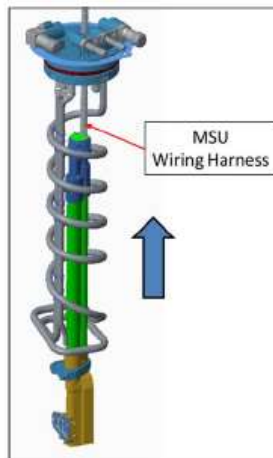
Feed the sensor harness through the bottom of the mounting base.
